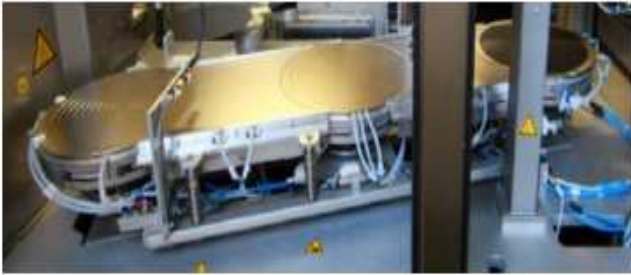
TriTemp slide system in ERS ADM330 debonding machine
